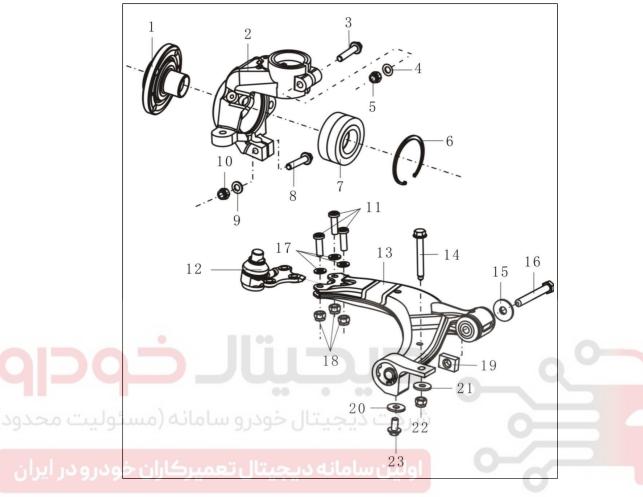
Exploded View of Relation Between Rocker and Steering Knuckle
